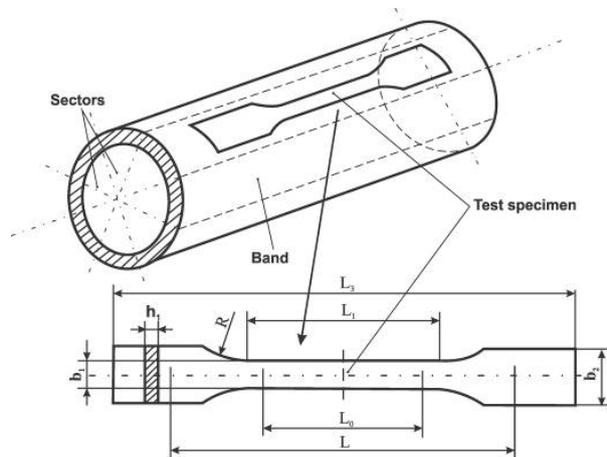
Tensile test specimens according to SR EN ISO 527-2000
